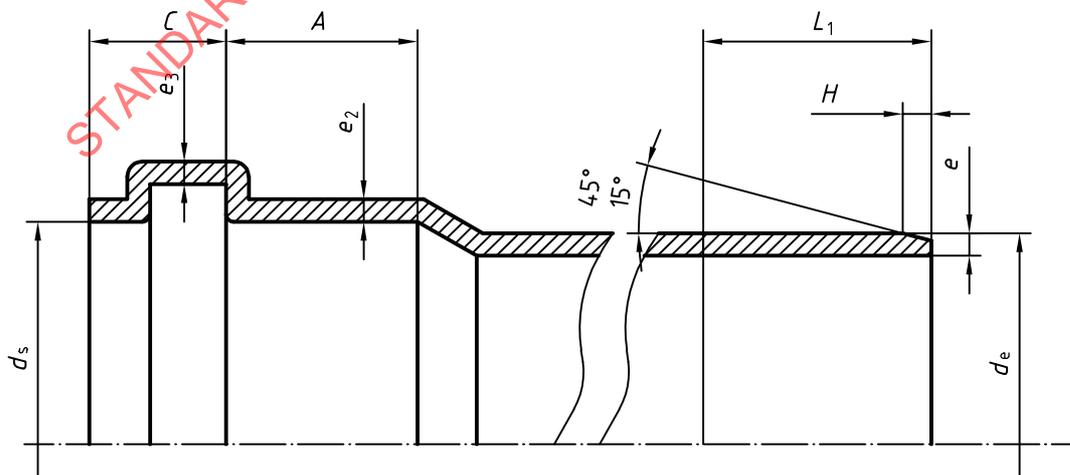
Basic dimensions of sockets and spigots for elastomeric ring seal joints
